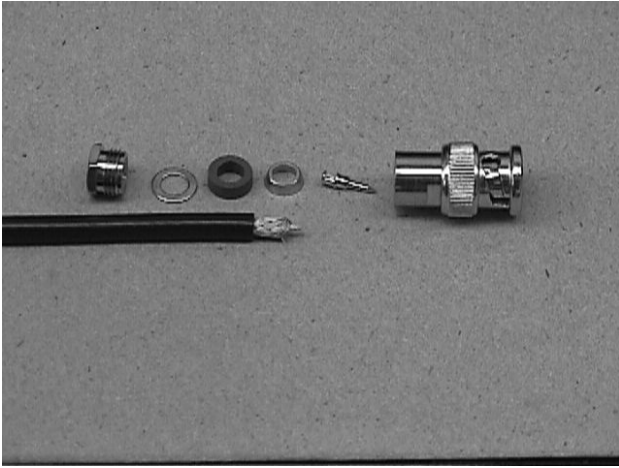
A stripped cable end and components of the BNC connector, from left to right: nut, washer, rubber compression ring, cone, center pin, and connector body. A 3-mm long section of the cable is stripped to the inner conductor, and an additional 6-mm length has the outer insulation stripped from the outer braid.
